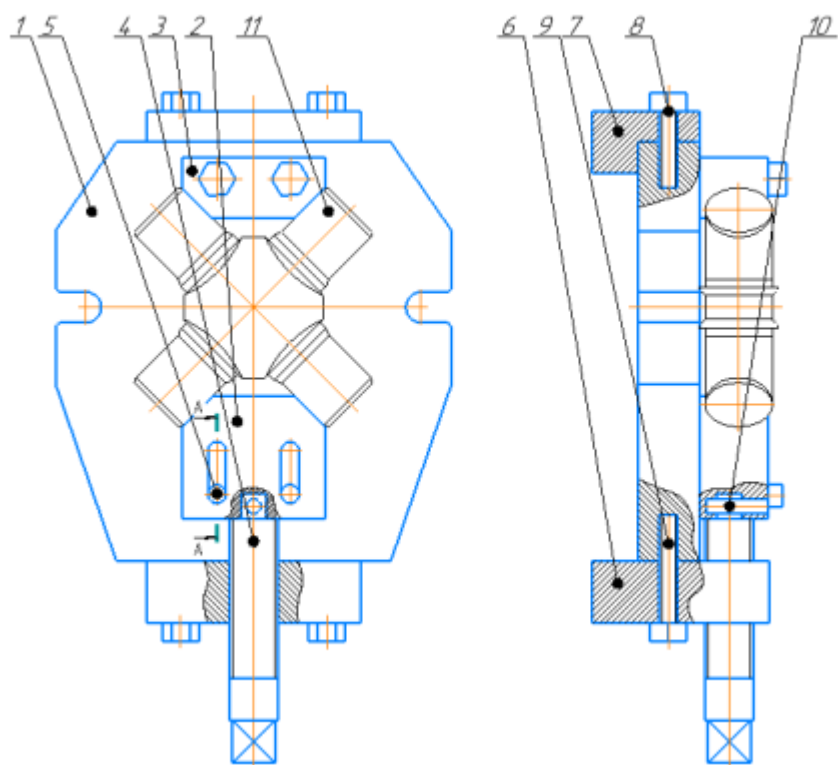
Assembly drawing of the device for fixing the crosspieces,
